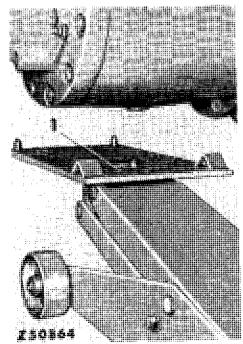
Mounting Plate, Combines 925, 935 and 945
